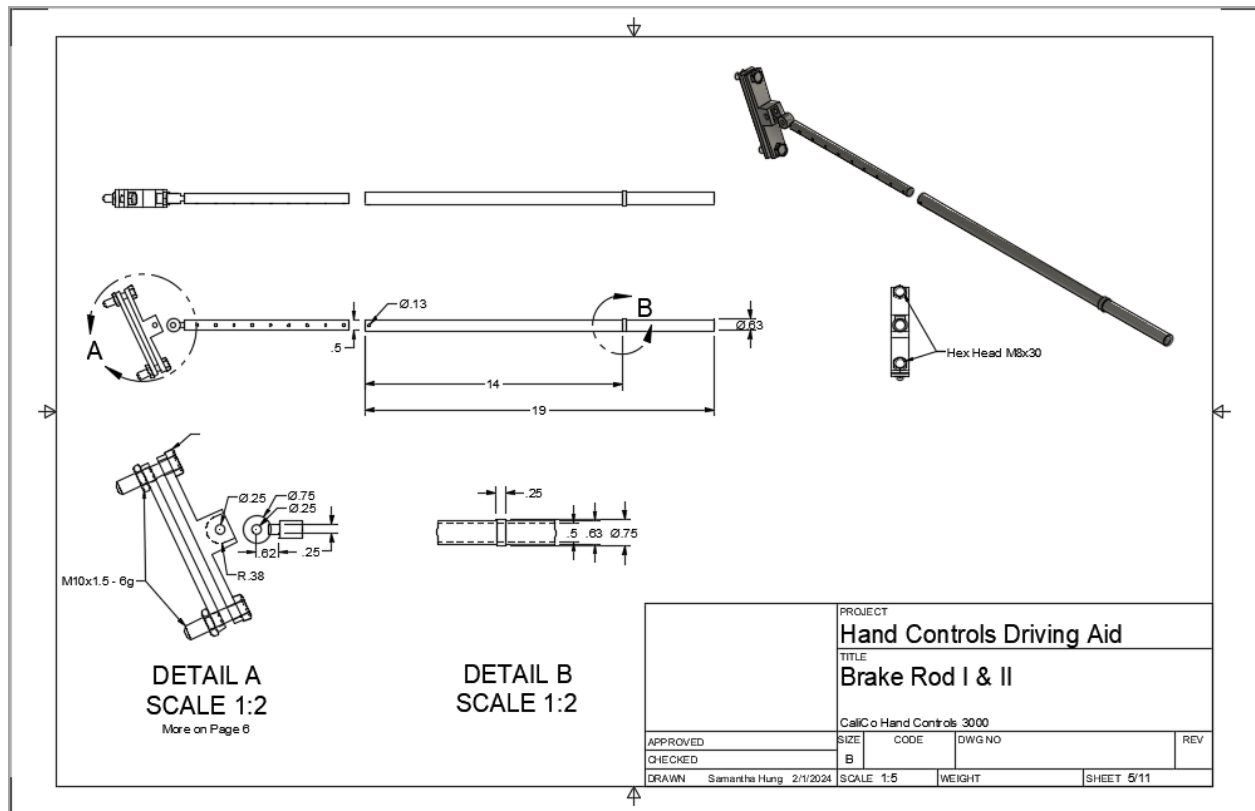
Detailed drawing and isometric view of the brake rod component
